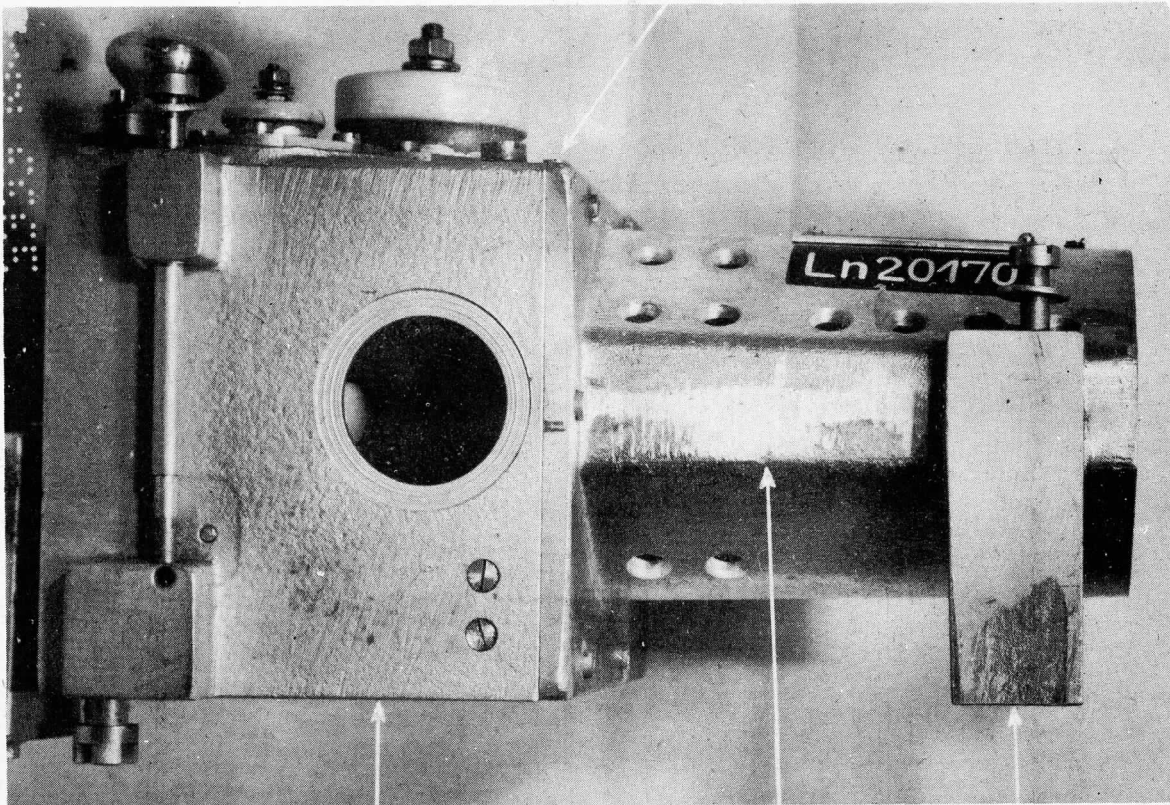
THE MILLING MACHINE HAS LEFT ITS MARKS ON THE SQUARE FACES OF THIS RADAR UNIT. NOTE THE IRREGULAR CASTING EDGE ON THE BLOCK AT TOP OF SECTION.
